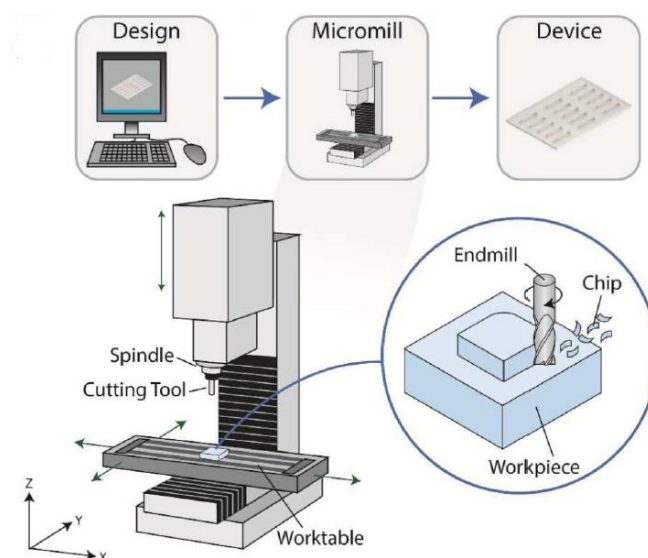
Components of a CNC system, including computer design, a worktable, cutting tools, and the schematic of producing microfluidic devices
